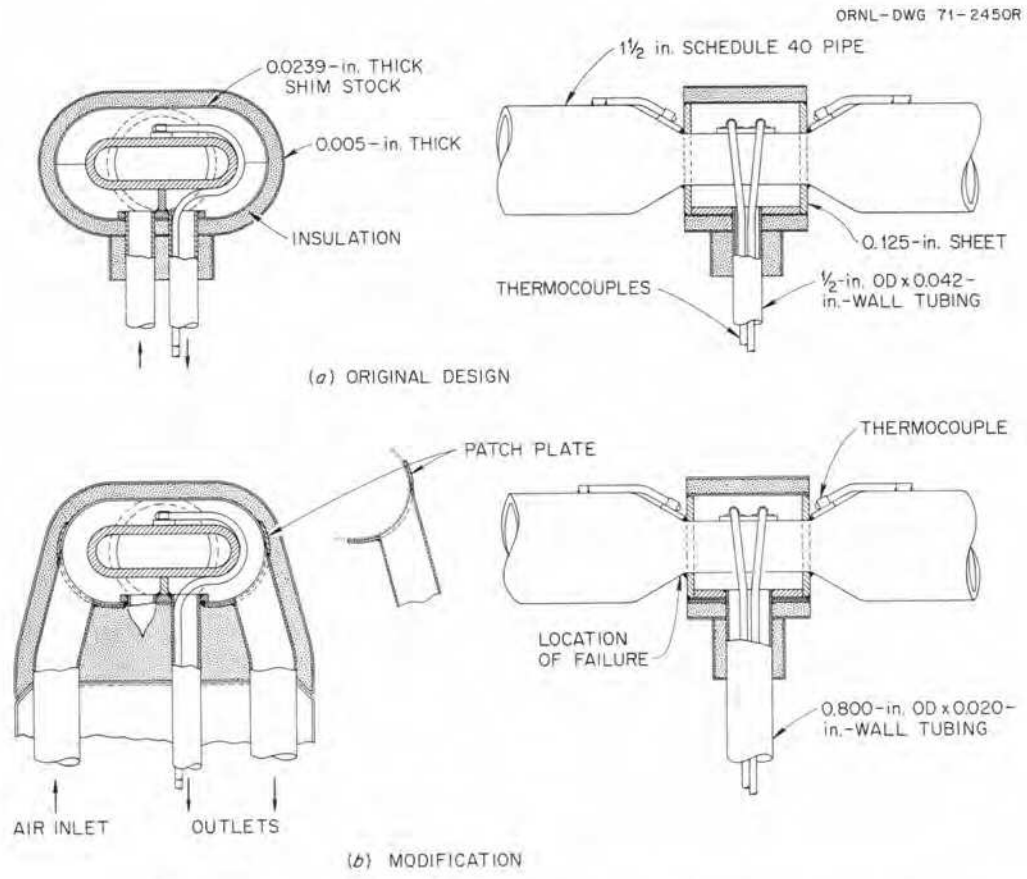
Diagram showing possible cause of freeze-valve failure after modification.
